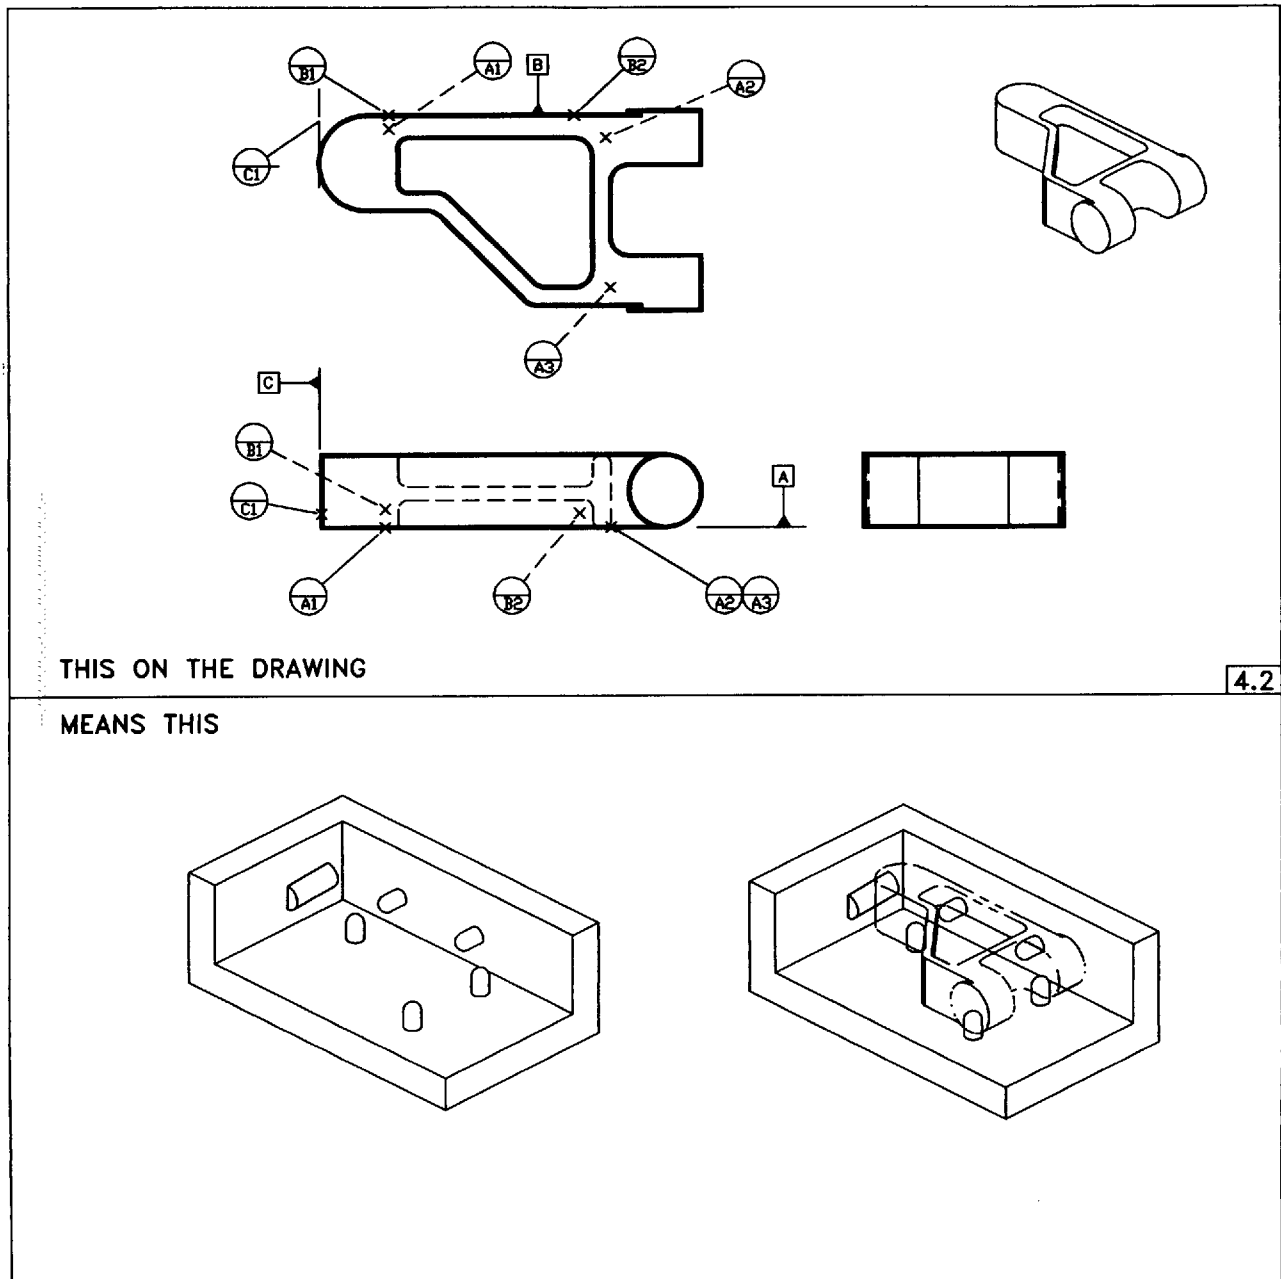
DATUM TARGETS ESTABLISHING A DATUM REFERENCE FRAME
